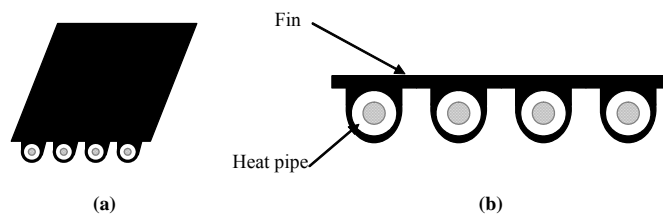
Conceptual radiator design, with a section of the radiator panel assembly (a) and a cross section view (b)
